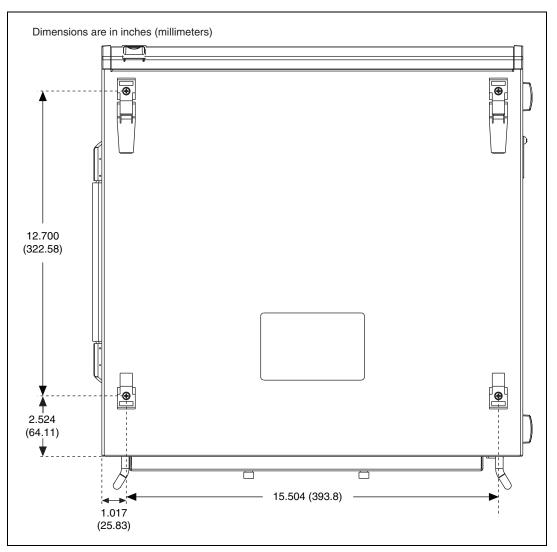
NI PXIe-1065 Chassis Dimensions (Bottom)
